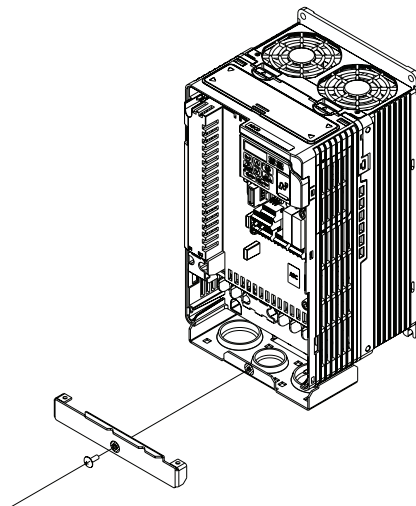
Removing the Screw to Expose Conduit Bracket
